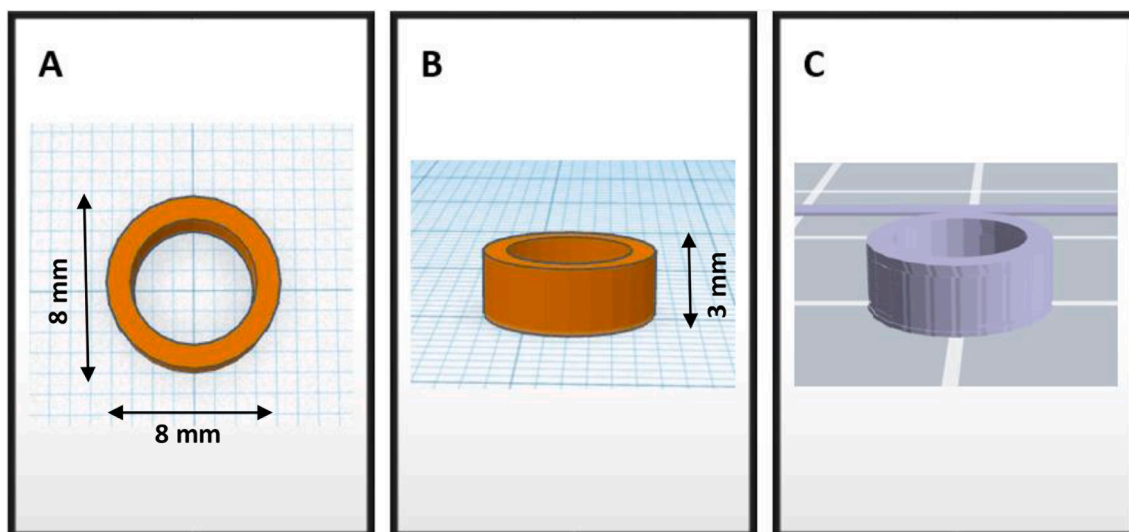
CAD designs for formulation F3 and F4: tinkercad top view (A), tinkercad side-view (B) and sliced design (C).
